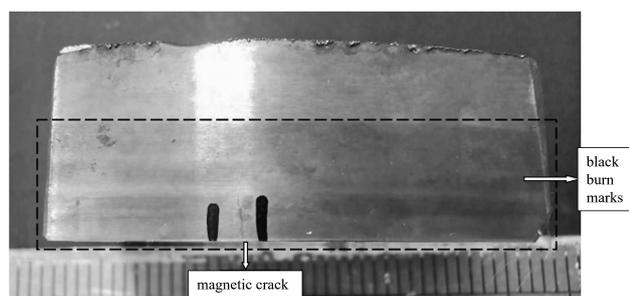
The corroded morphology of the crankshaft specimen
